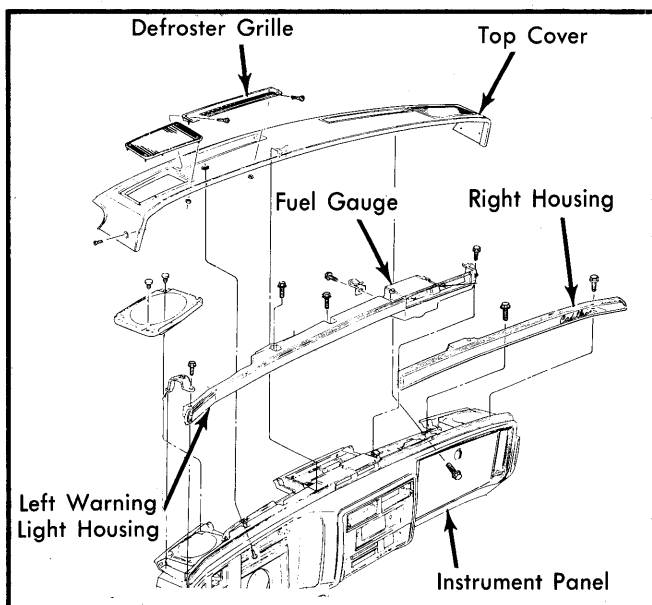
Cadillac Instrument Panel Top Cover (Fleetwood and DeVille)
